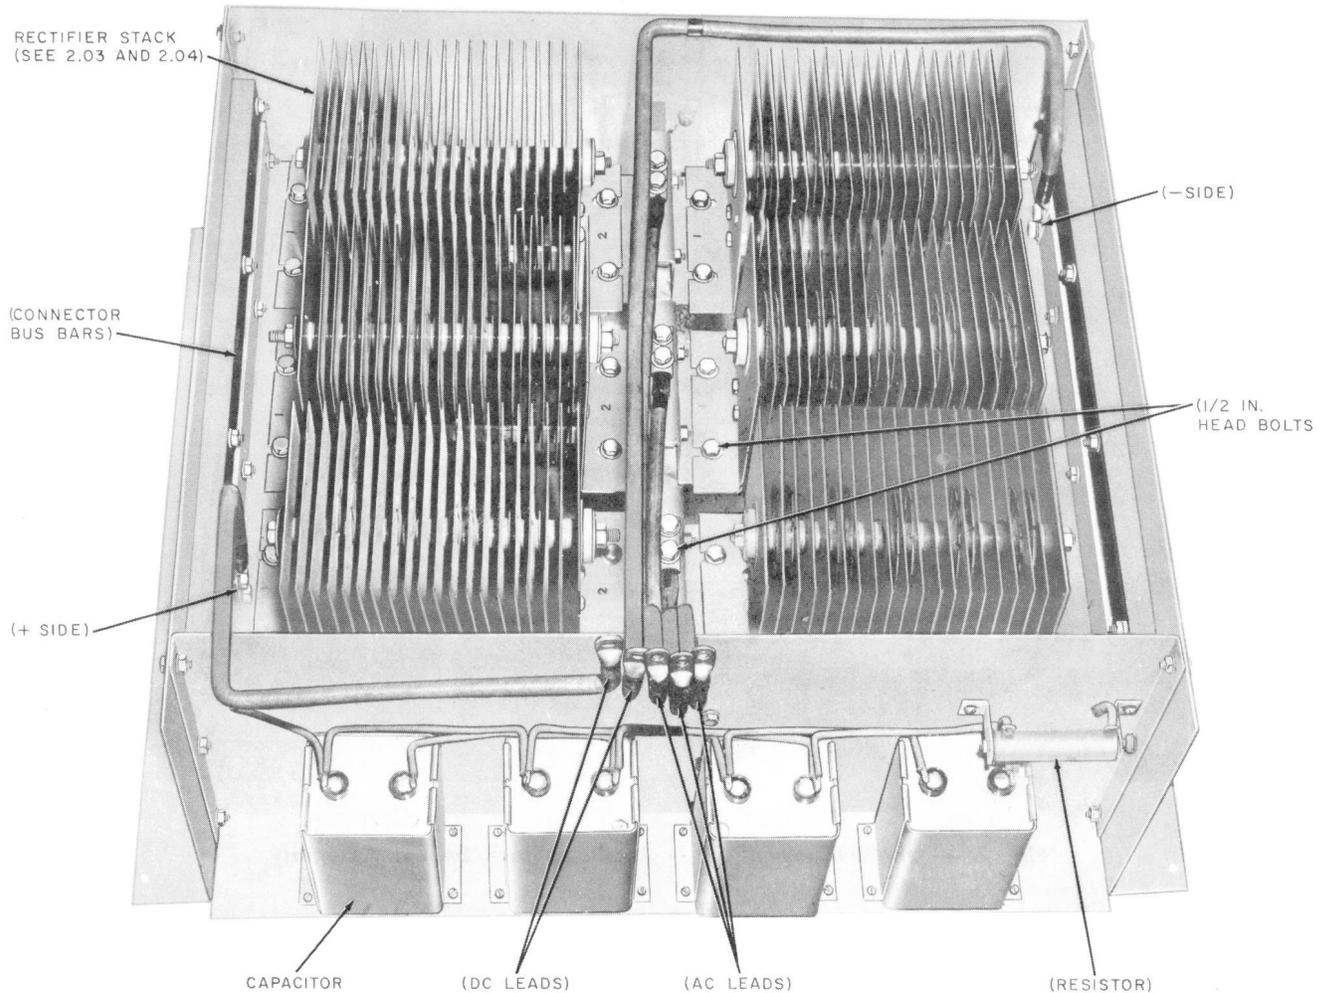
Typical Rectifier Stack Basket Assembly — Front View
